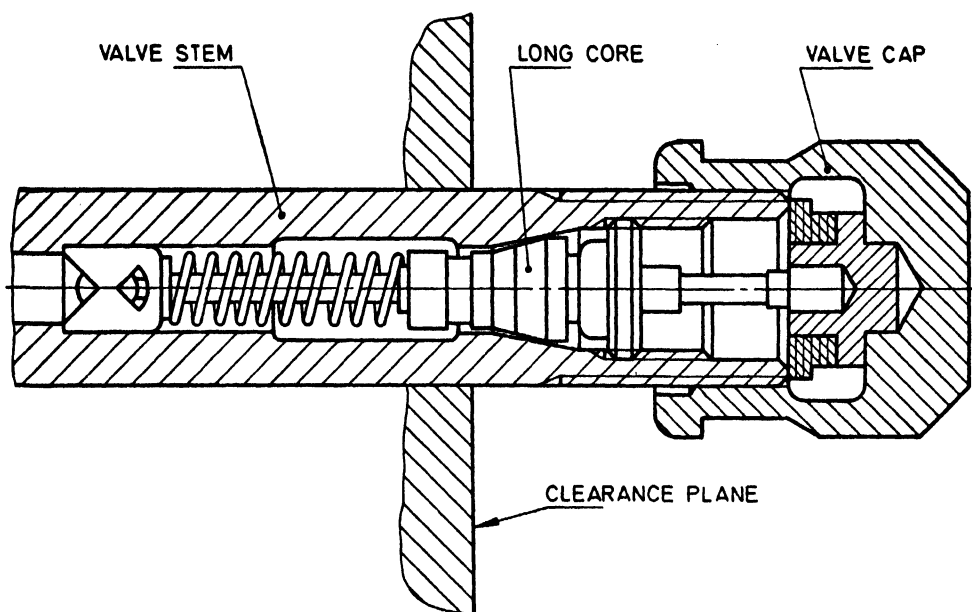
GENERAL ASSEMBLY — LONG CORE
